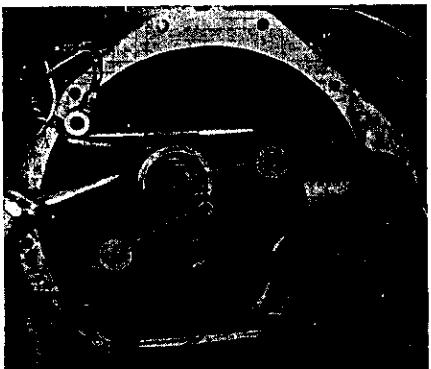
Two concentric shafts are used when tractors are equipped with dual plate clutches. Outer shaft (2) drives pto, inner shaft (1) drives transmission.
